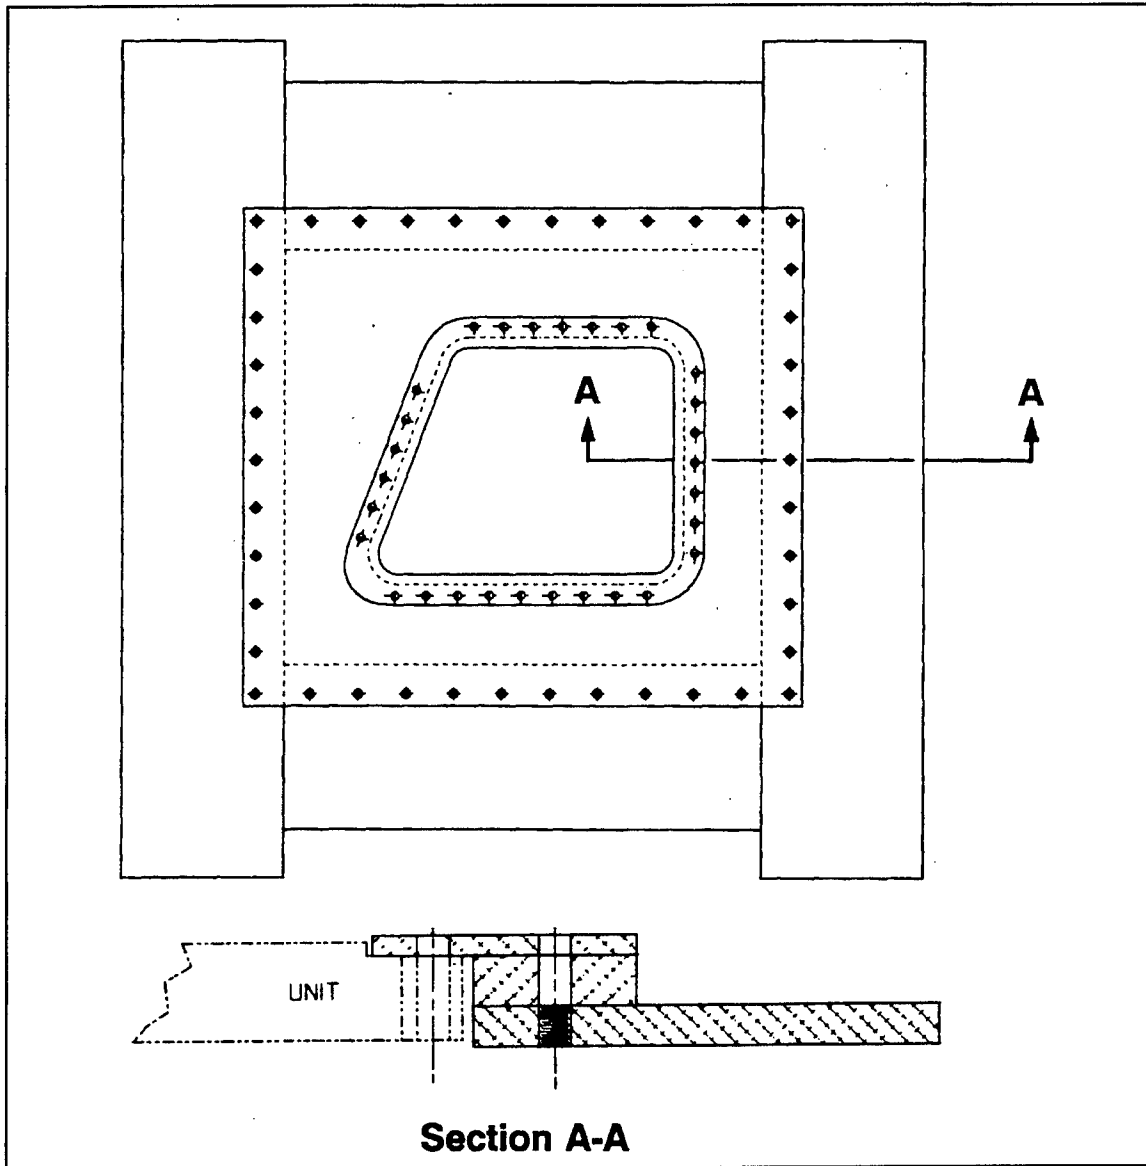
C/KC-135 #1 W/WS Bird Impact Mounting Frame
